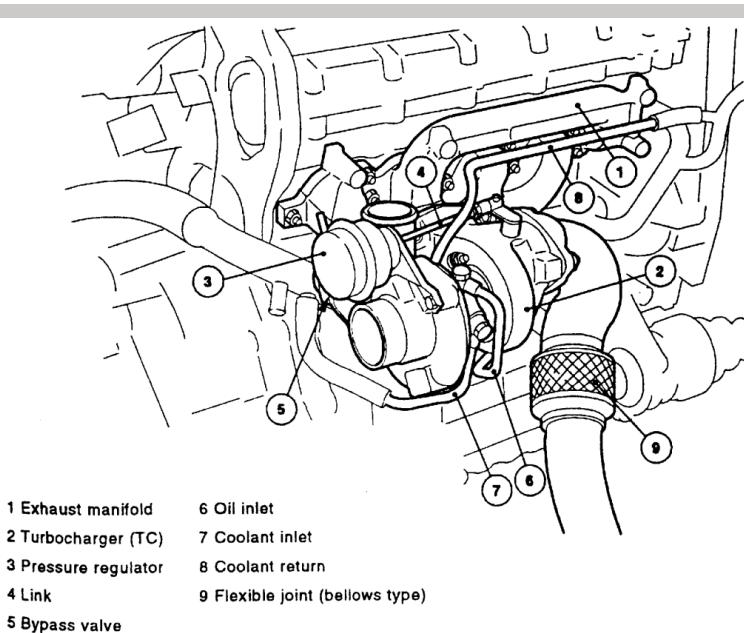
Turbocharger assembly and related components-2.3L and 2.4L 5-cylinder engines
